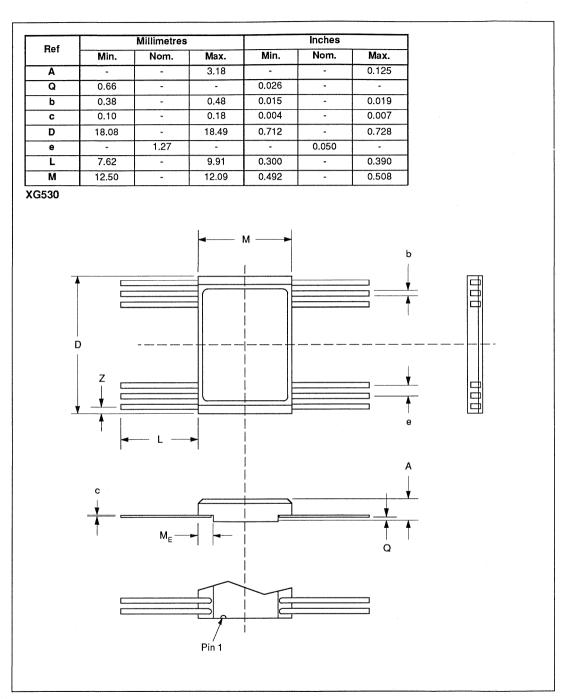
28-Lead Ceramic Flatpack (Solder Seal) - Package Style F
